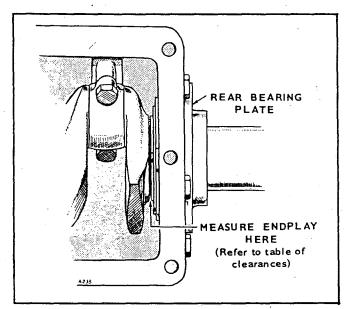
MEASURING CRANKSHAFT ENDPLAY
